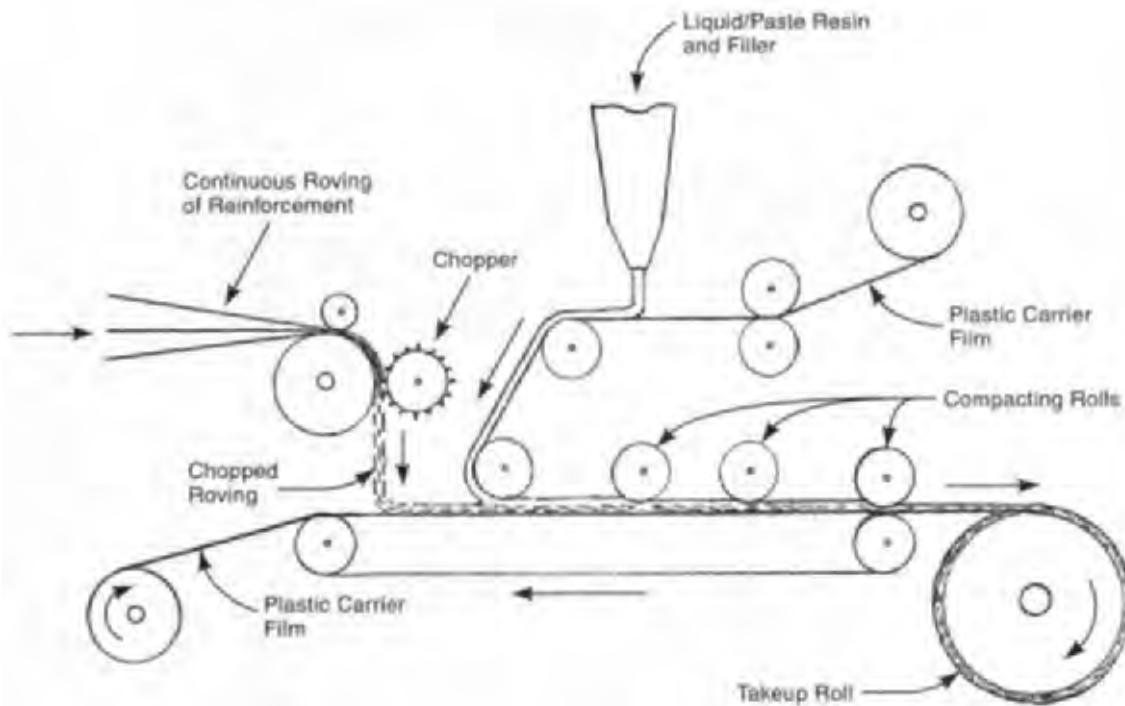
G8a Making a continuous laminate of reinforced thermosetting plastic for later molding. Edge trimming and cutting to length usually follow the operation shown.
